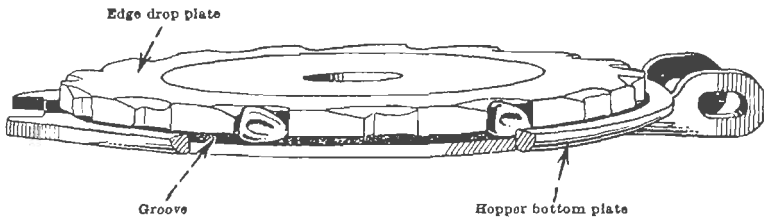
Edge-drop plate assembly showing position of kernel.
